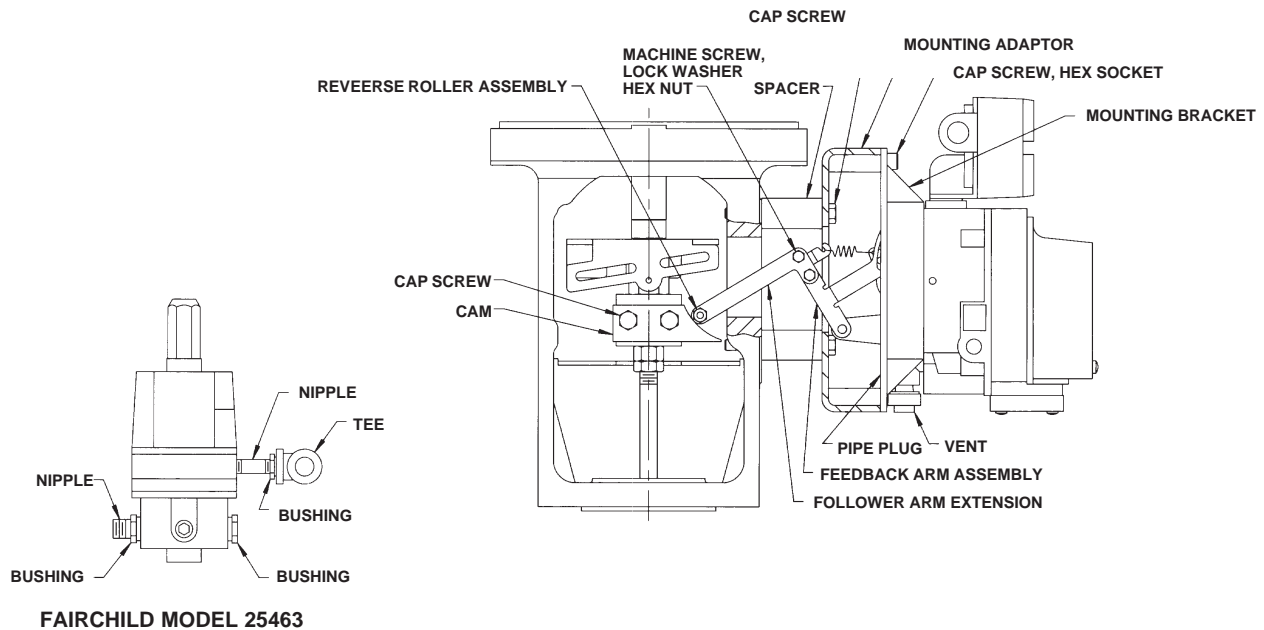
Type DVC5020 Digital Valve Controller with Fairchild Model 25463 Relay Mounted on a Type 585 Size 50 Actuator
